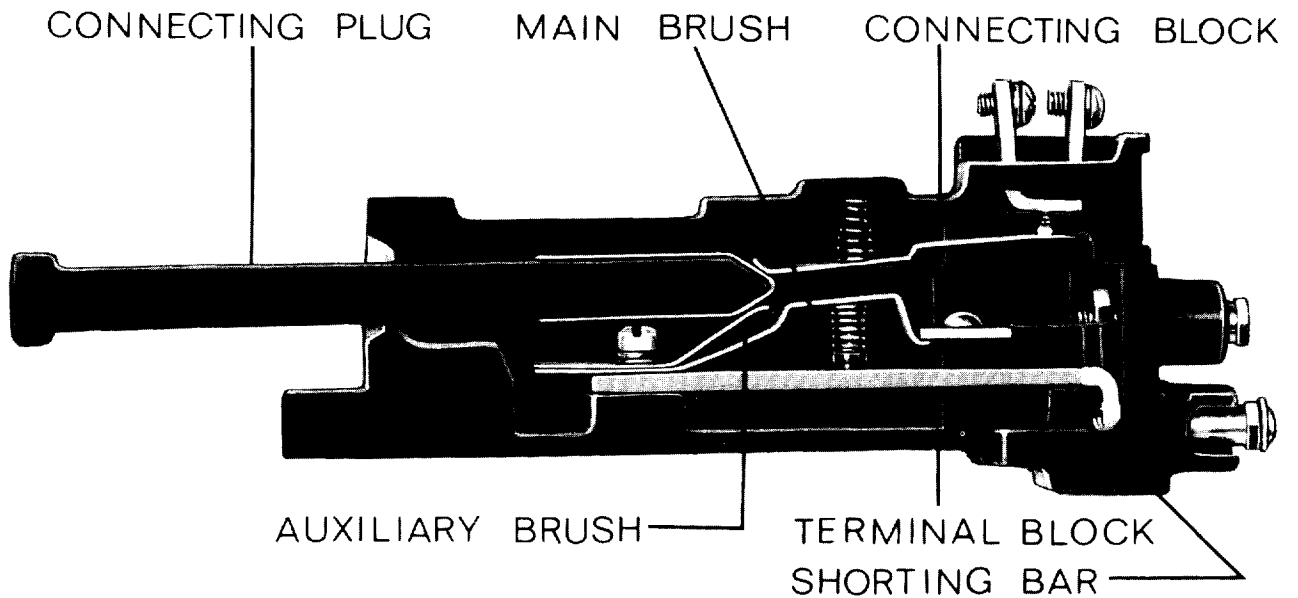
(8023399 and 8027689) Low Gradient Contact Assembly for the Directional Unit
